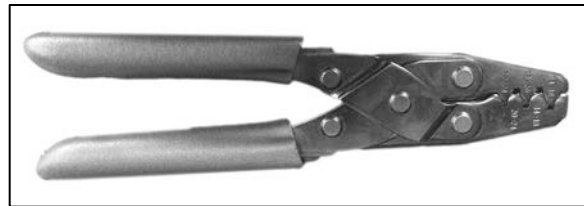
Open Barrel Crimping Tool 14-24 AWG
